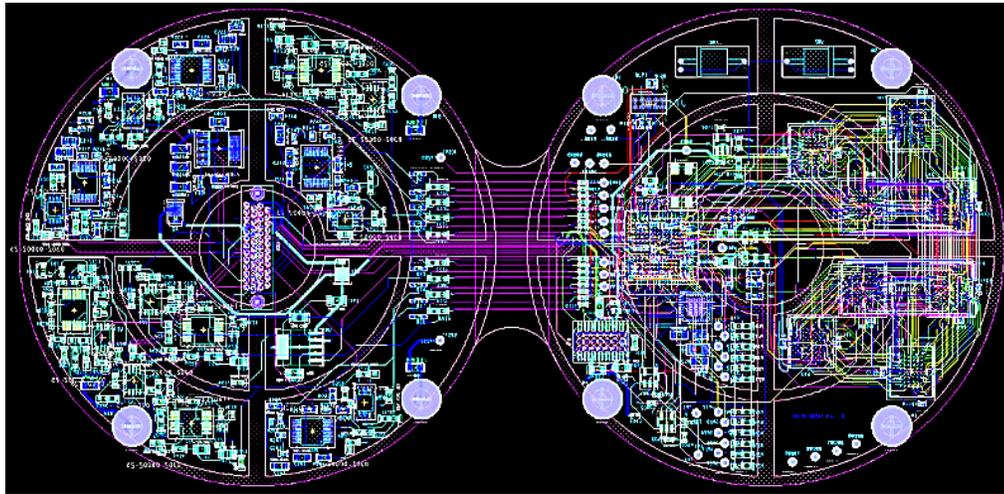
ARRT-167 PCB Layout with Spacer Keep Out Areas
